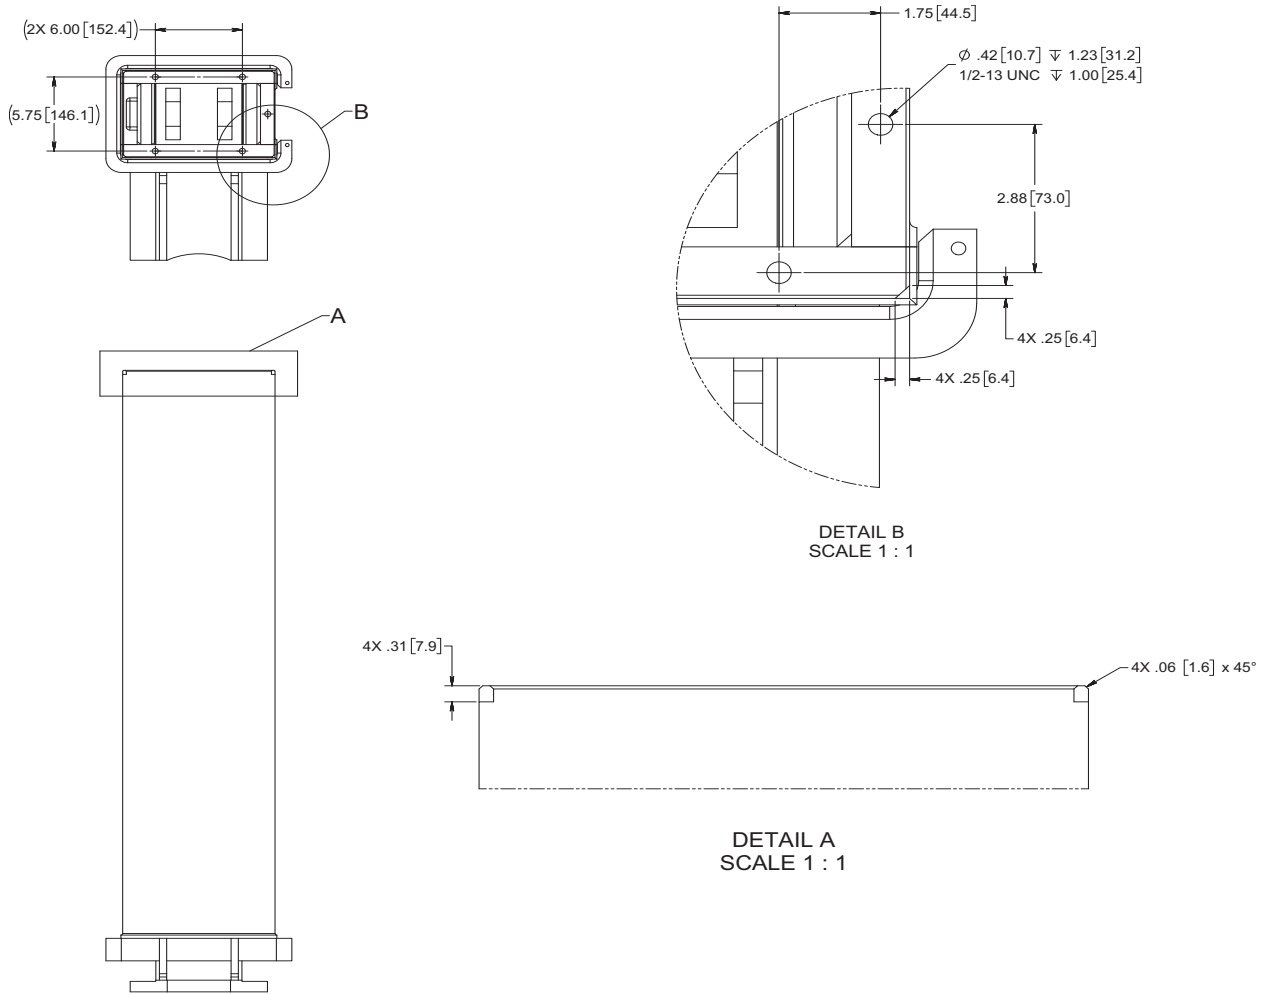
BUW Inner Tube modification (DT24641 or DT23018)
